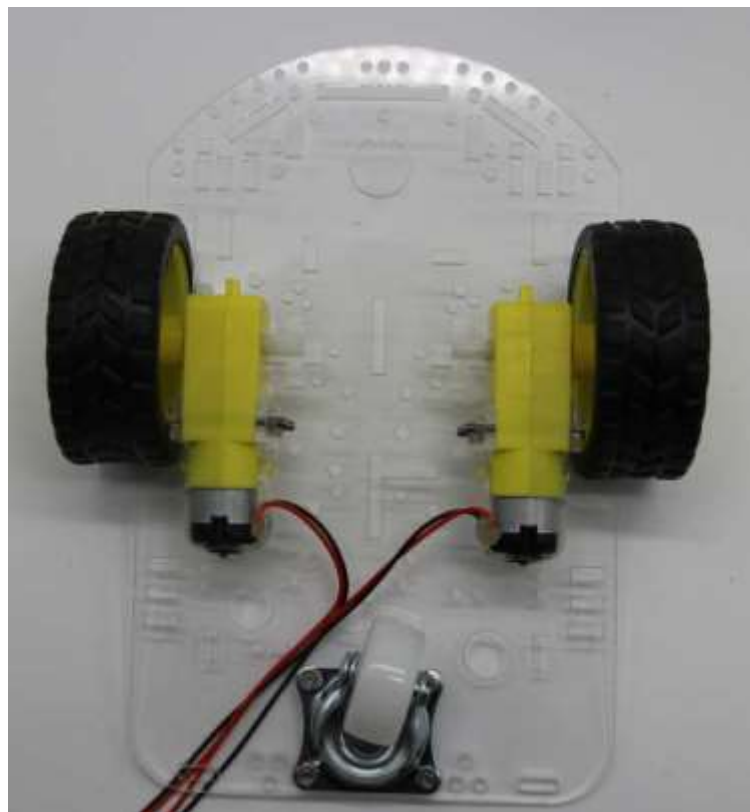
14 : Insert by pressure the two large wheels on the outer axis of each gearbox motor
